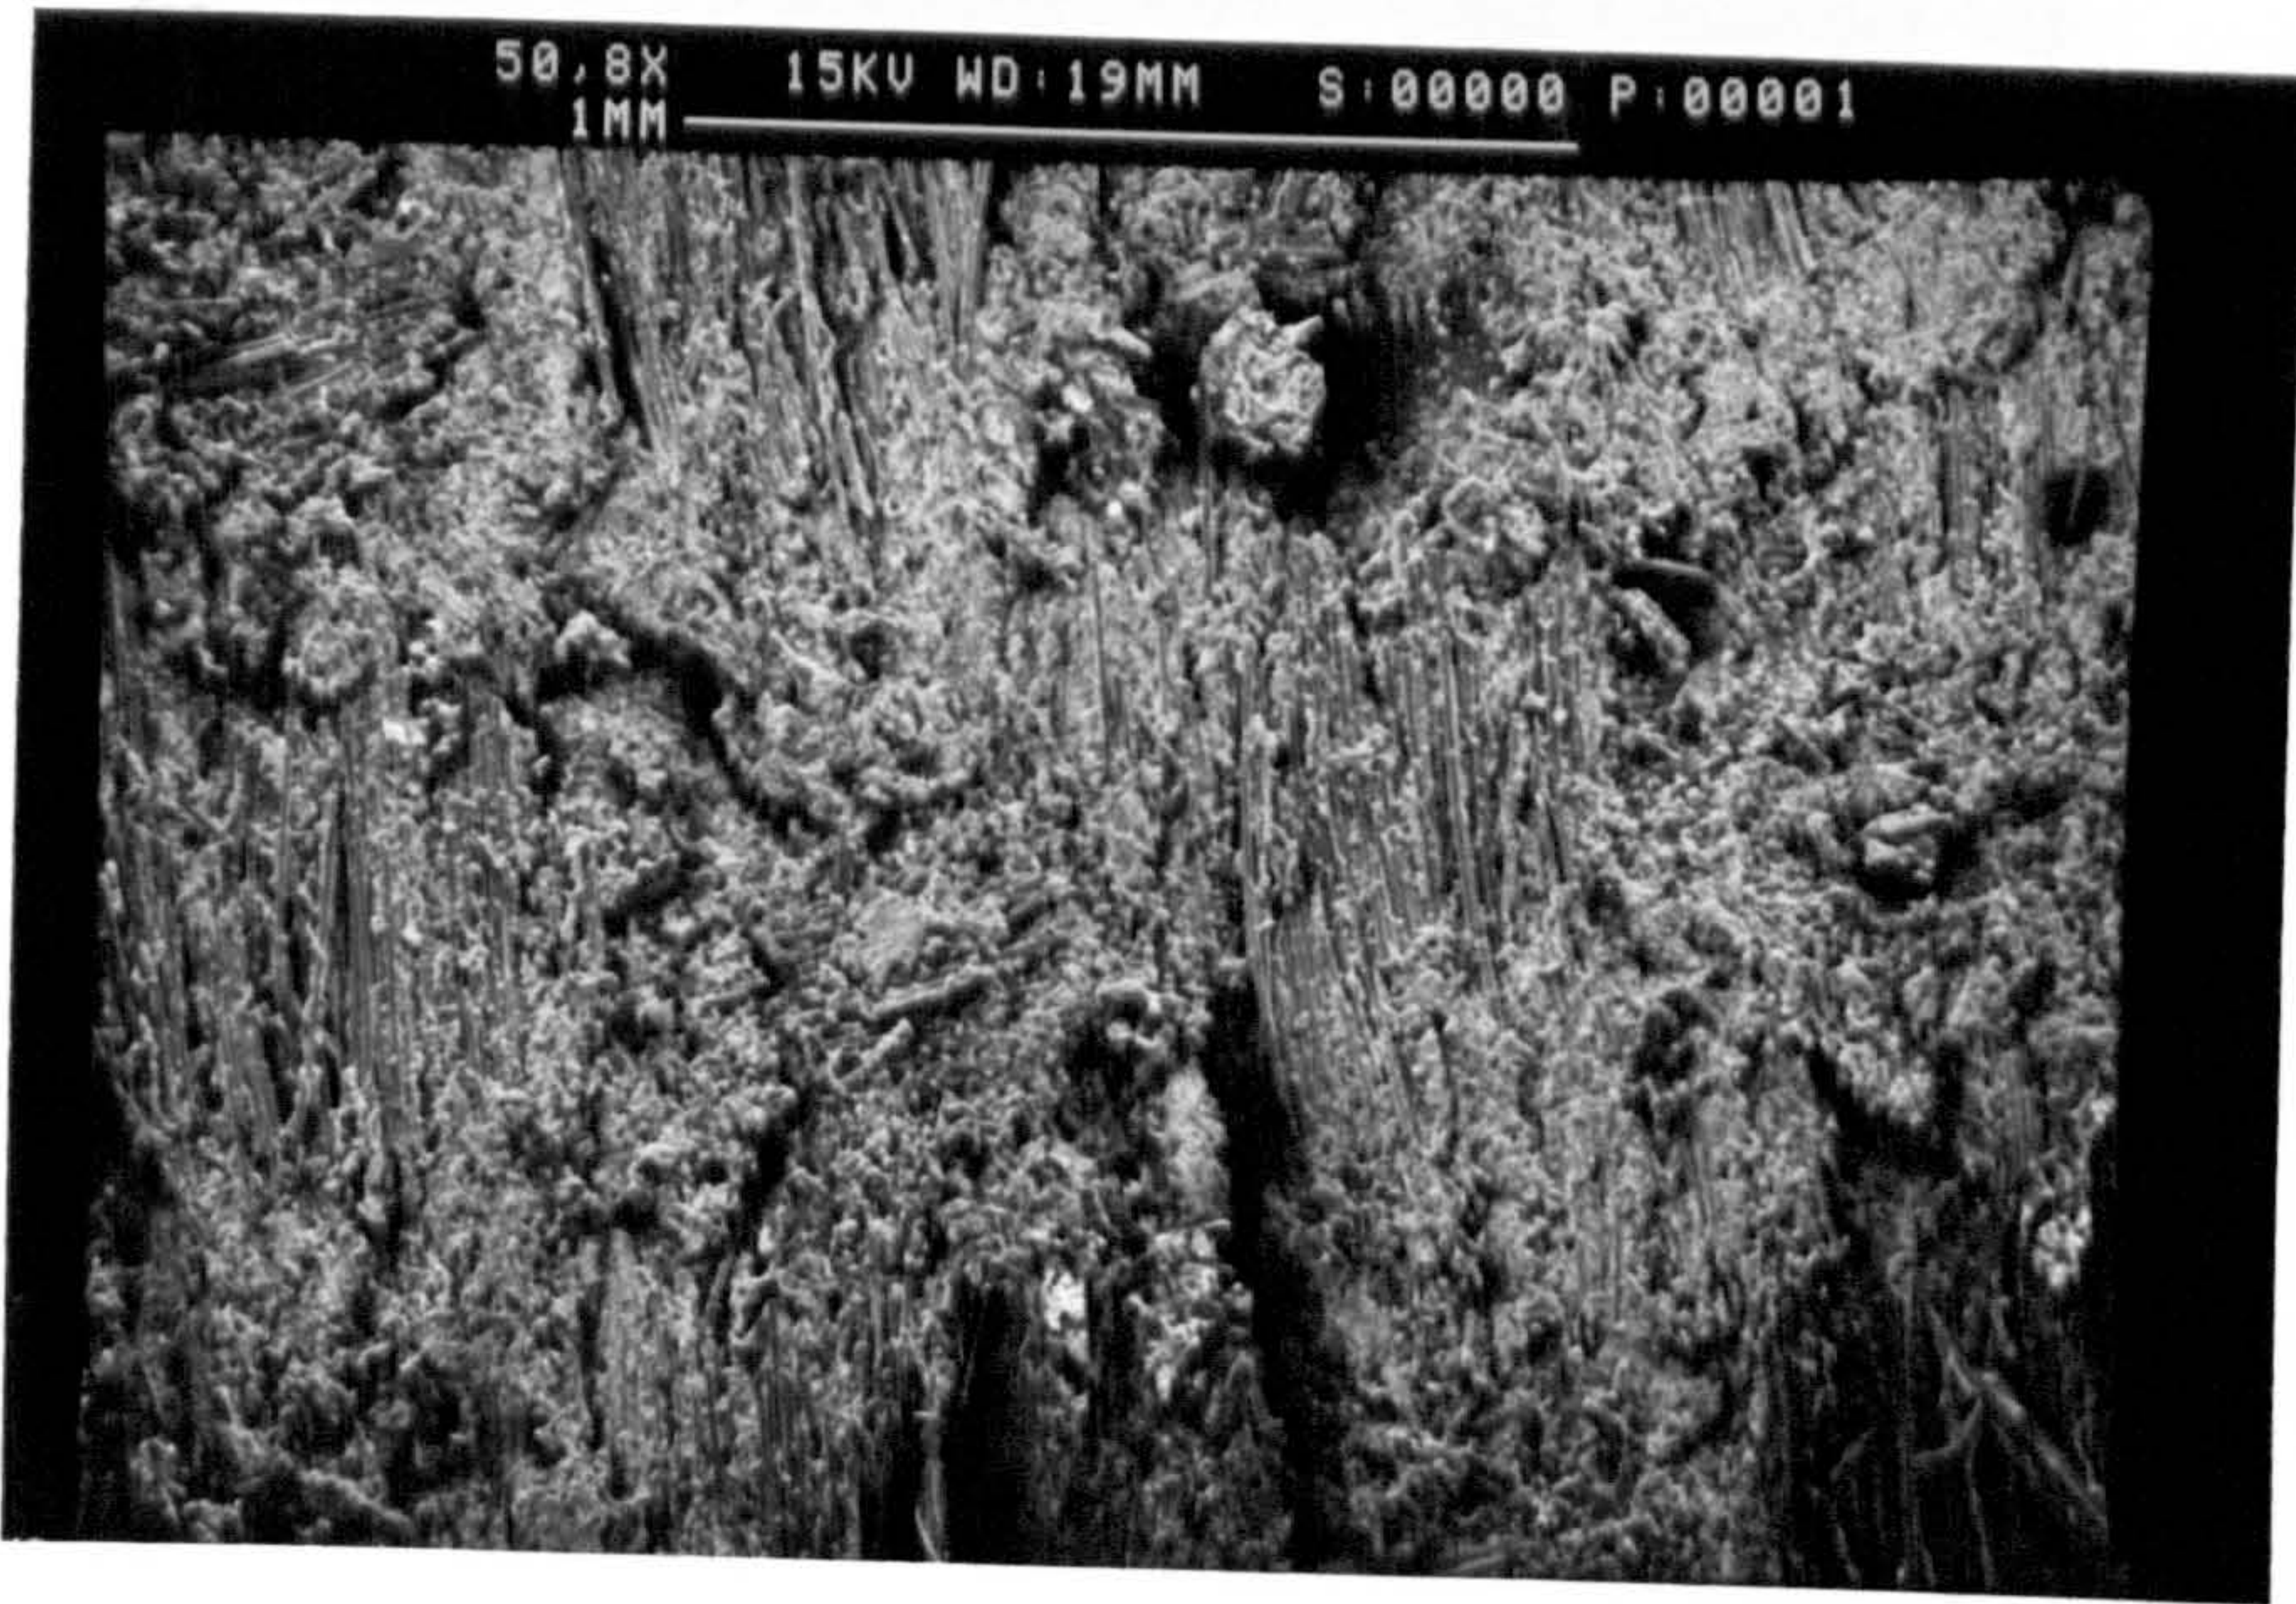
GFRP surface machined by high negative raked ( $-20^\circ$ ) tool.
